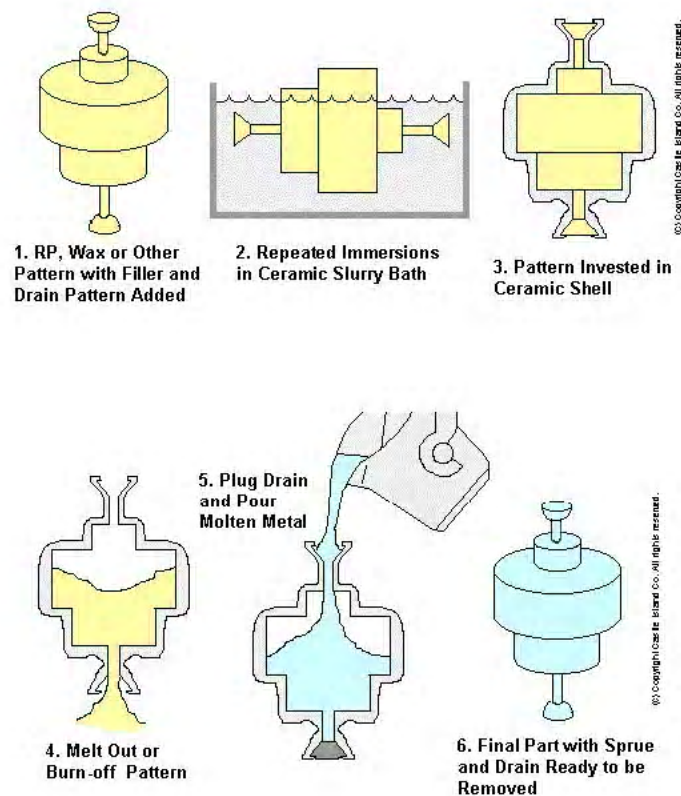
Schematic representation of the Investment Casting Process [3]
